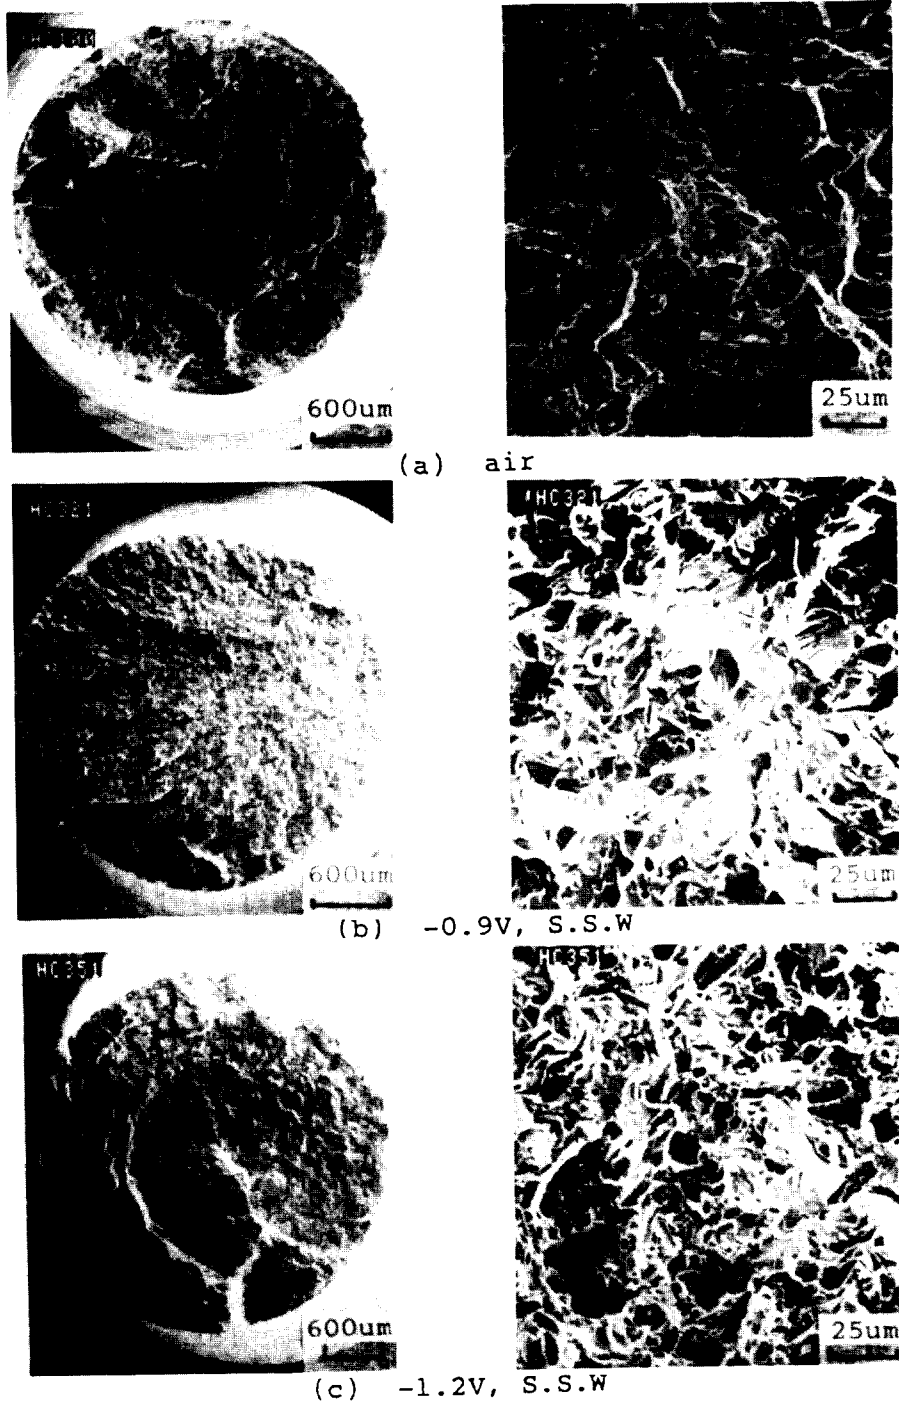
Micrographs of fracture cross-section and surfaces of SM45C welded joint under cathodic protection in S.S.W. and in air
